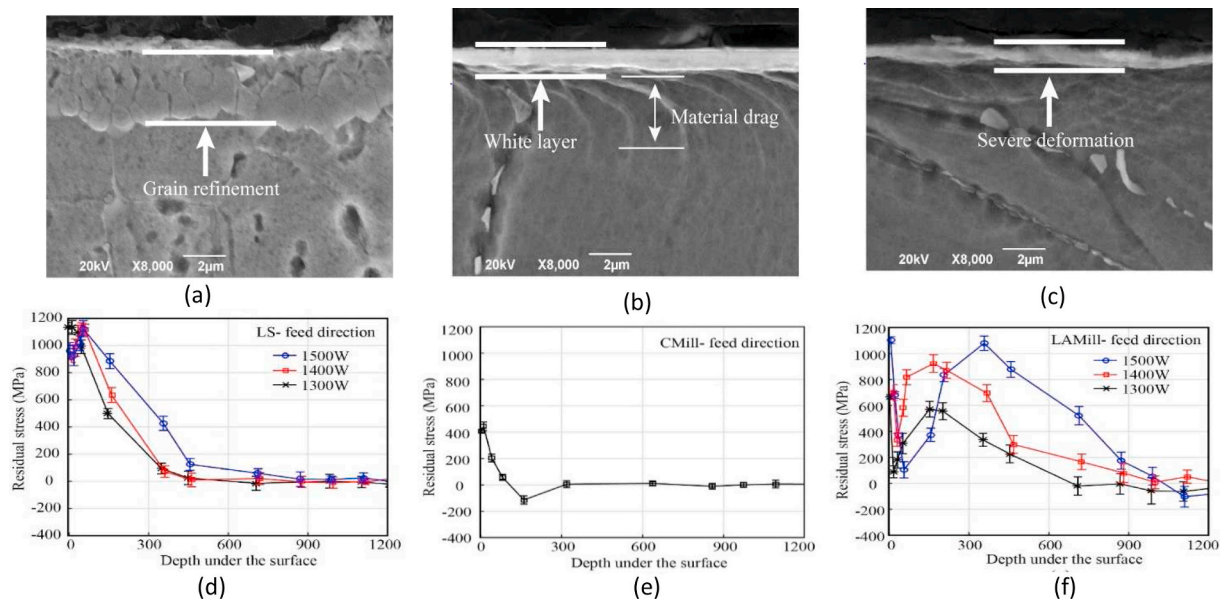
Surface damage and residual stress of (a) and (d) laser heating only, (b) and (e) conventional machining, (c) and (f) laser assisted machining of Inconel 718 [125].
